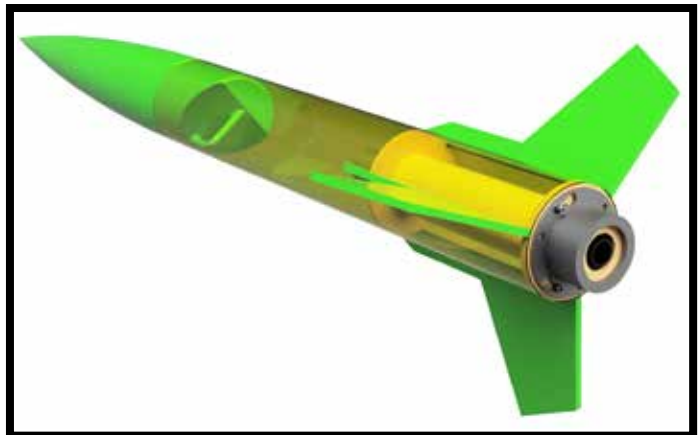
You might insert screws in front of the motor or the adapter to prevent it from moving forward. This would be like an engine block in the tube, but removable in case you wanted to use longer motors.
